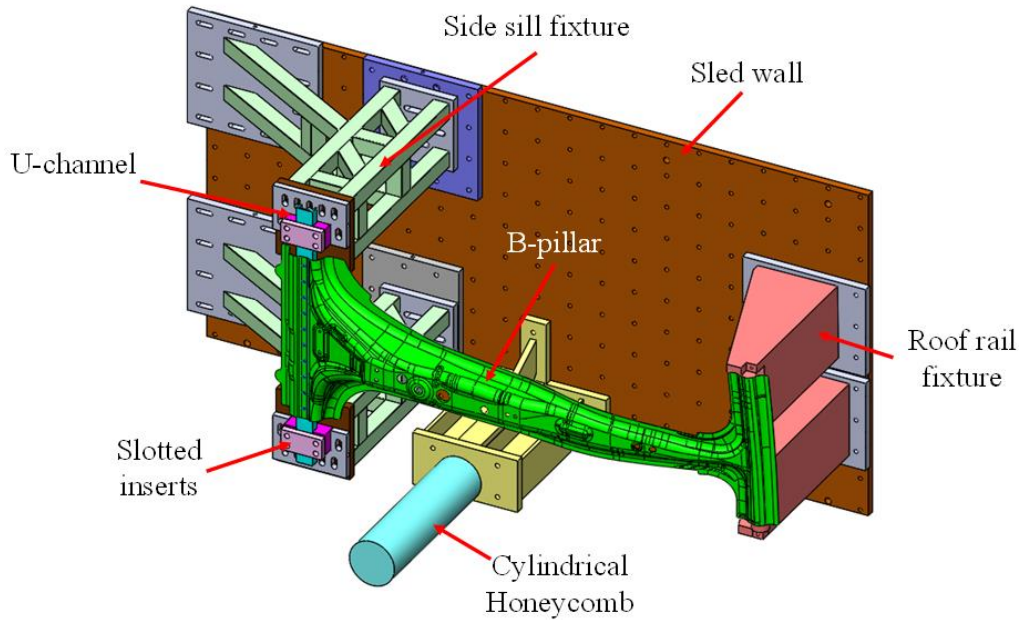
Assembly of the B-pillar Fixture generated using CAD software
